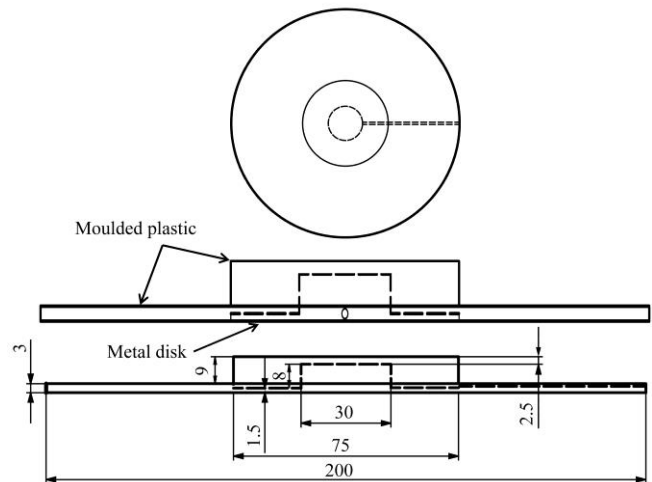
Design of semi-rigid disc for tri-axial whole body vibration seat accelerometer according to the dimensions of ISO 10326-1. All dimensions are in mm
